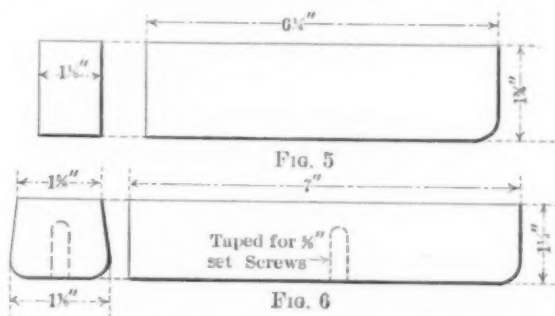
FRACTURE TEST BAR PATTERN; FIG. 6 MANIPULATIVE CHILLER
